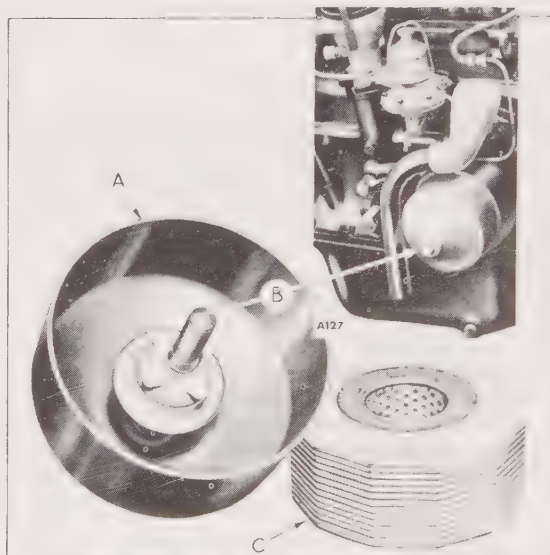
10 Oil filter and mounting on 6-cylinder engines.
